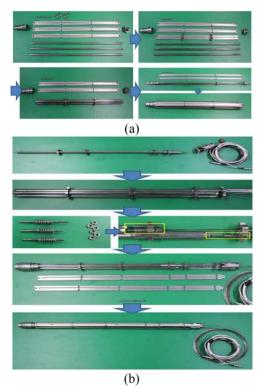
Fabrication process of fuel rod assembly and supporting structure (a) uninstrumented fuel rod assembly (b) instrumented fuel rod assembly and supporting structure.
